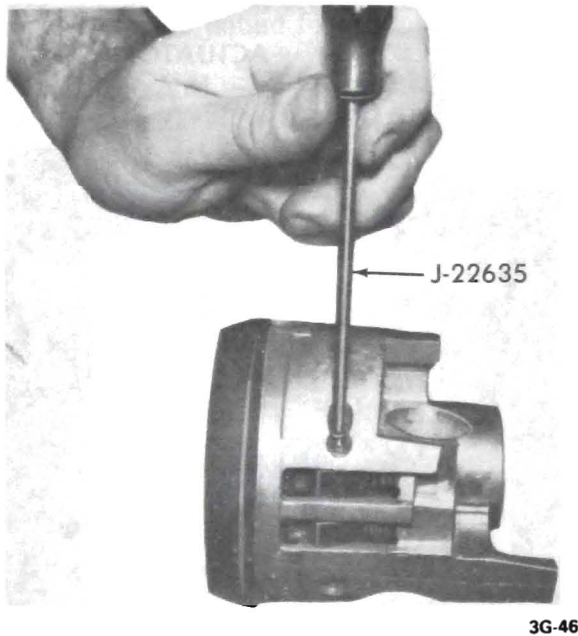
G-66 - Removing Lock Shoe Pivot Pin
